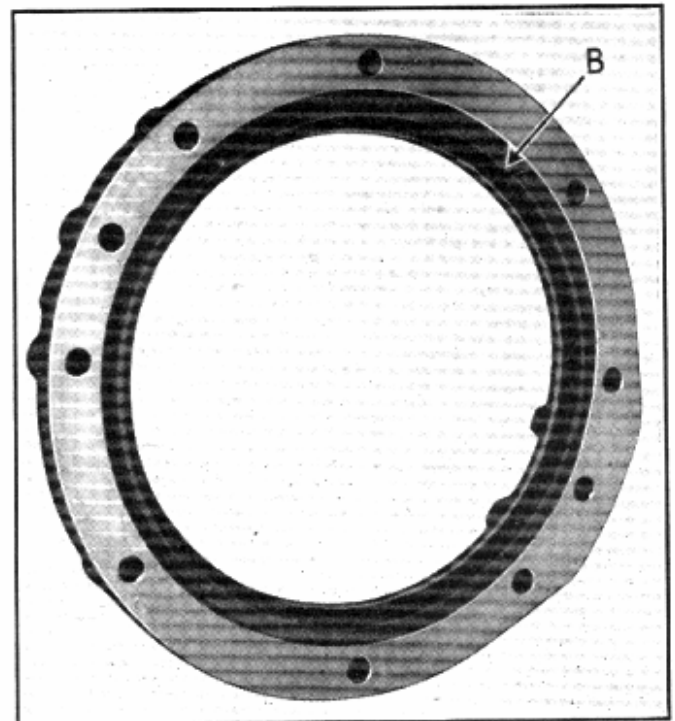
Steering Knuckle Retainer Flange 6" Joint
